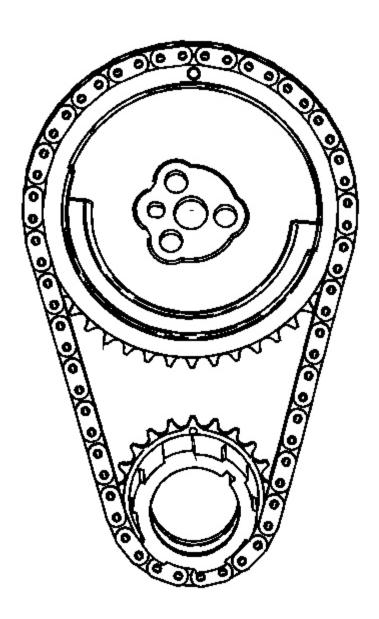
Camshaft And Crankshaft Sprocket Alignment Marks Courtesy of GENERAL MOTORS CORP.
